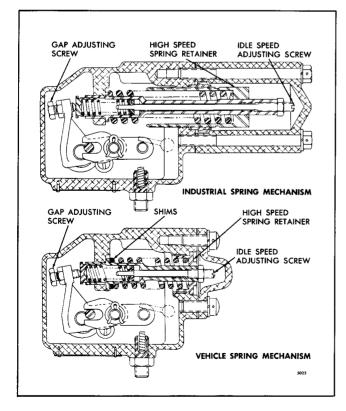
Differences Between Industrial and Vehicle Spring Assemblies
